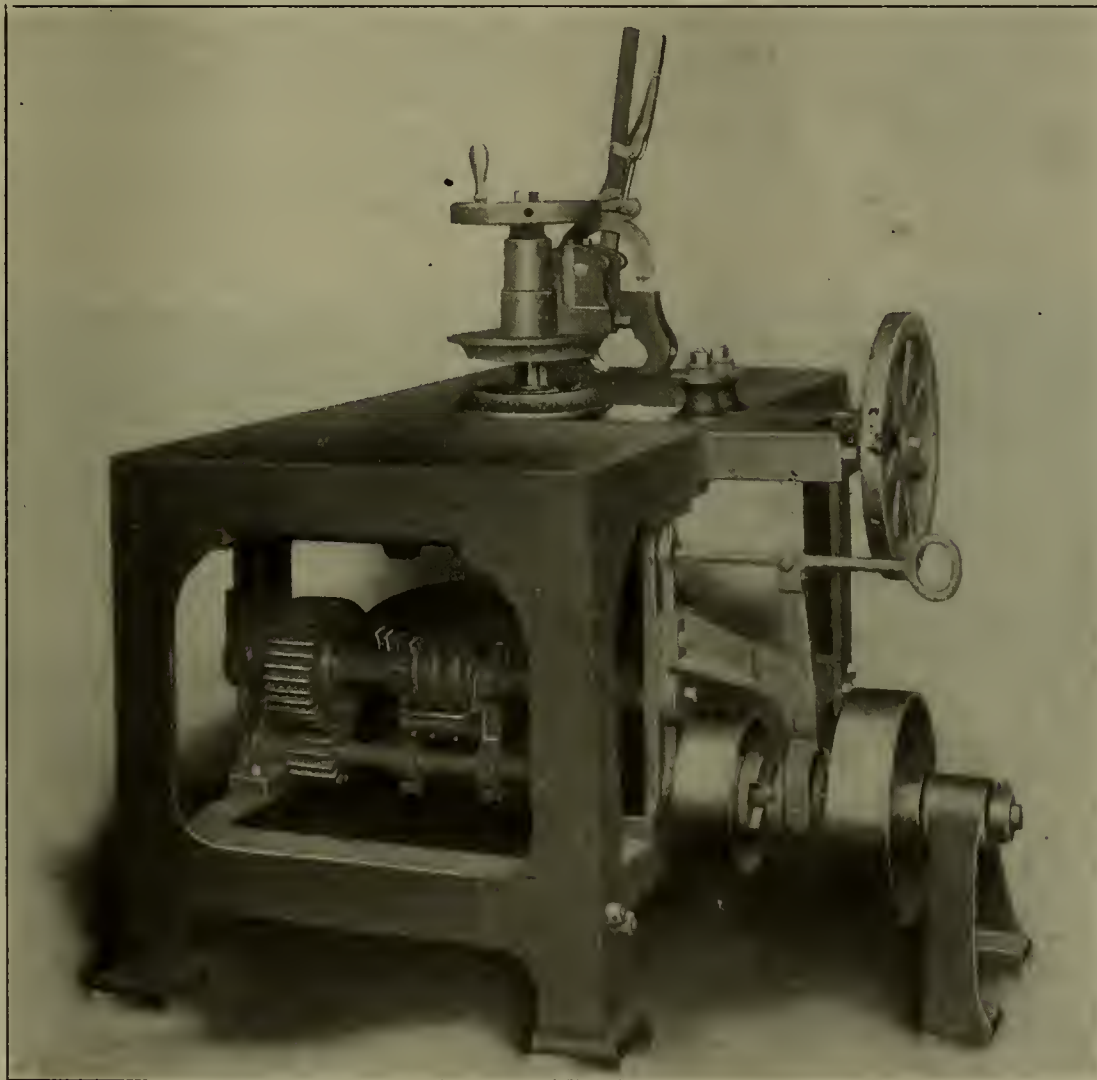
AUTOMATIC PIPE BENDING MACHINE.
